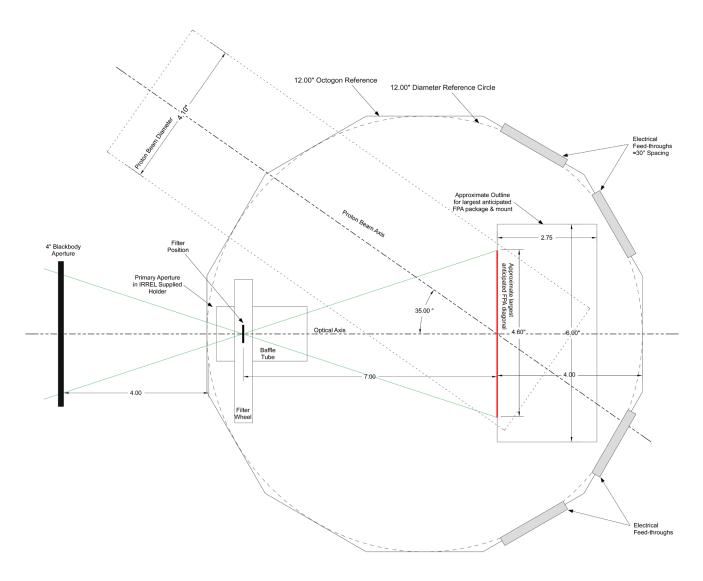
Large Format Dewar cold plate conceptual layout. Dimensions are in inches.
